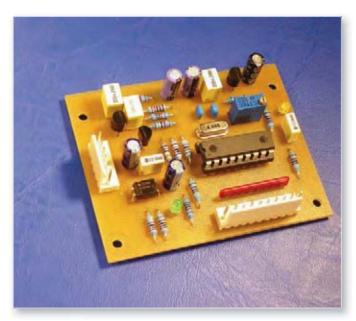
The assembled project using Ken's p.c.b. layout of Fig. 5.
